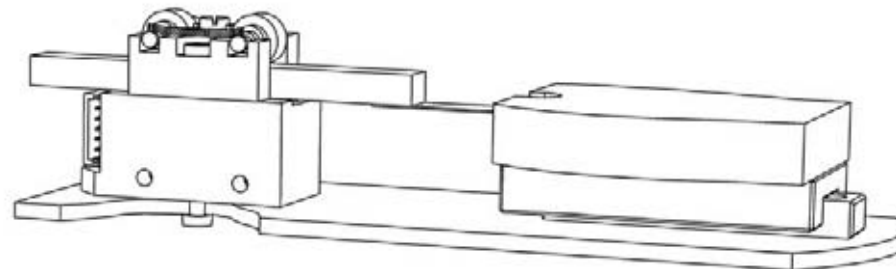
Flexible mounting. The flexible sheet metal will conform to the flat bottom of the motor housing without deforming the housing.
